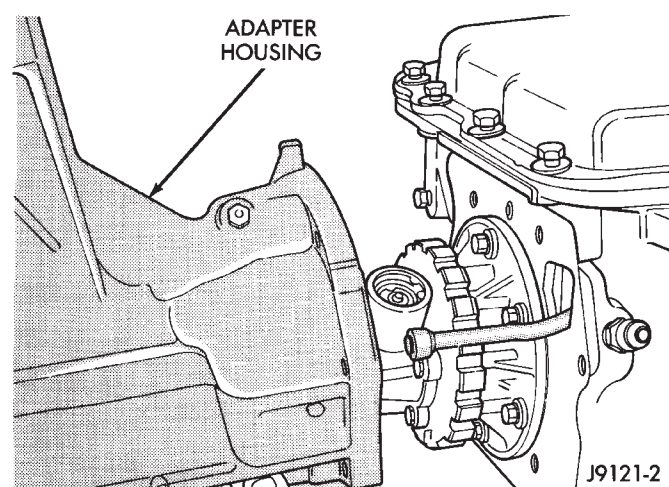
Adapter Housing Removal/Installation (4 x 4 Models)
